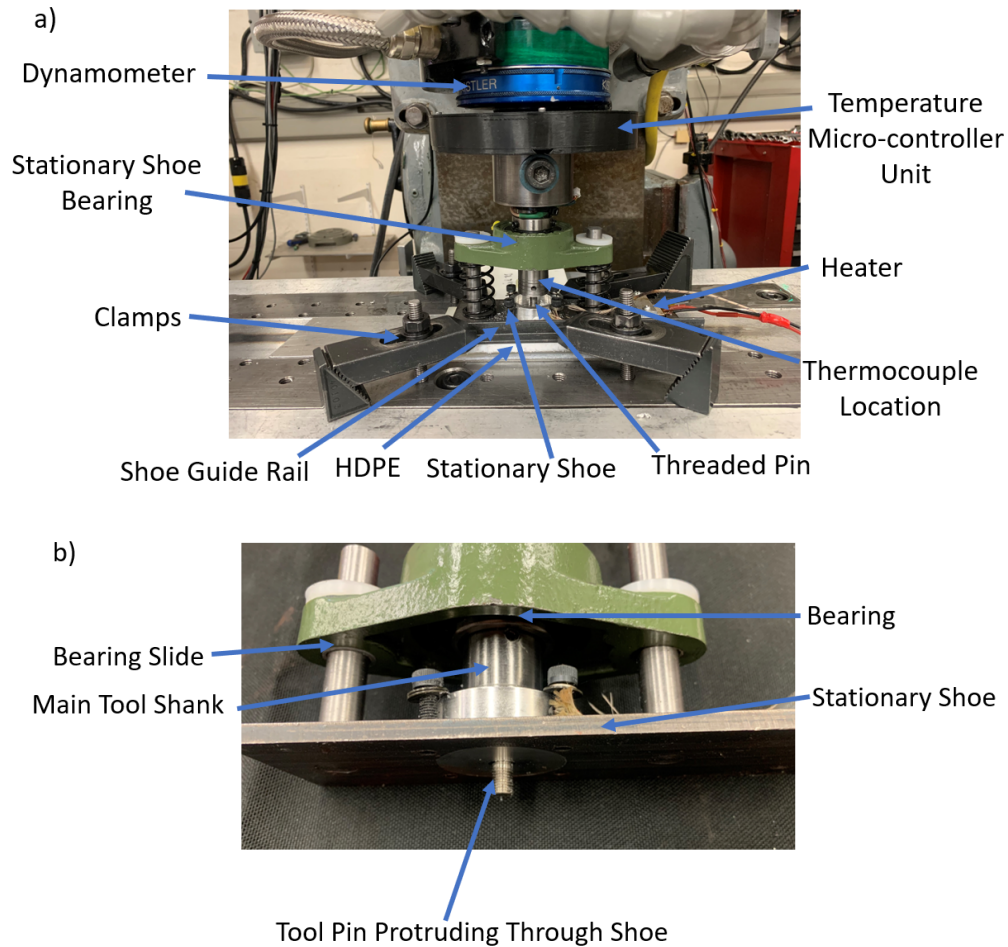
a) Diagram of tooling setup. The dynamometer measures welding forces. The temperature micro-controller unit collects data from a thermocouple located inside the tool shank. A bearing mounted to the tool shank centers the pin with a hole in the shoe. b) Underside of stationary shoe. The tool pin protrudes through a hole in the shoe when plunged.
